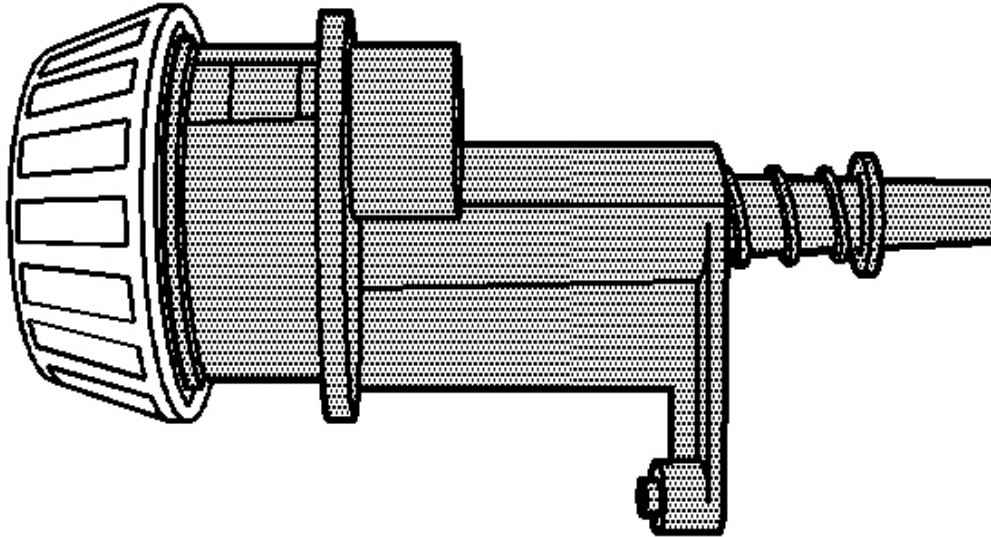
Inner Pinion Bearing Installed Onto J 33838
